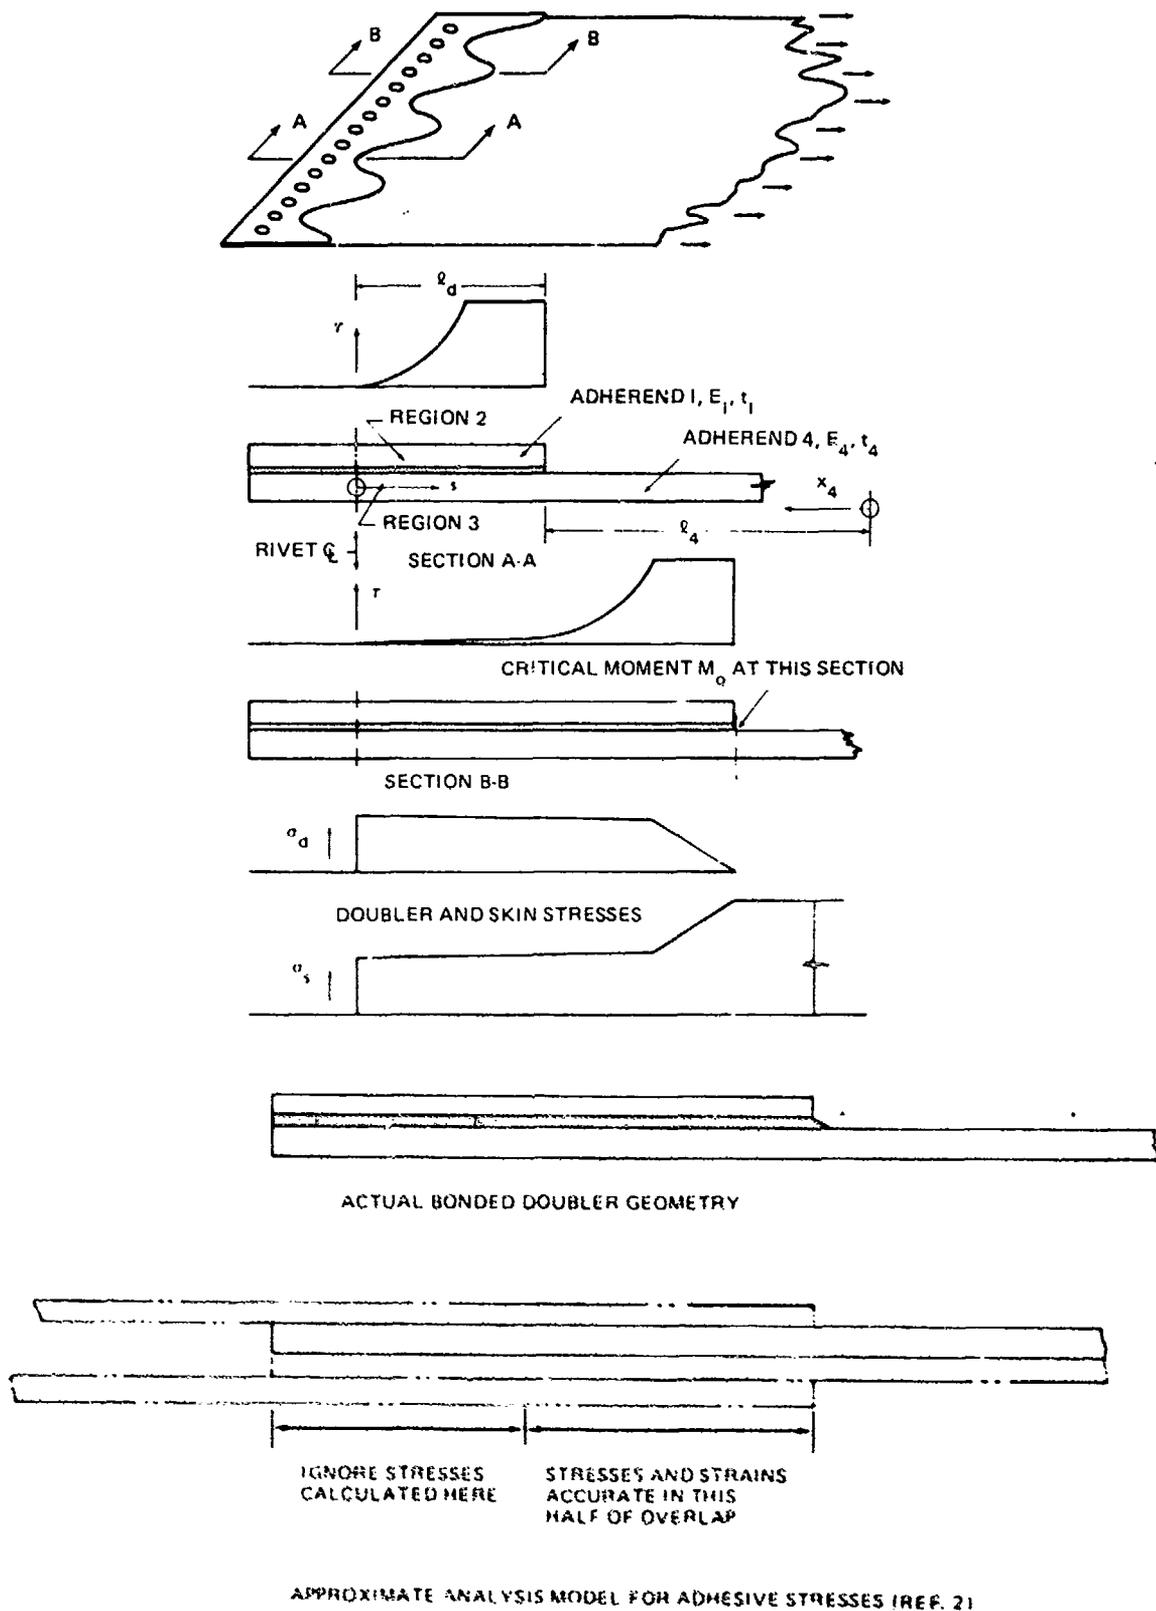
ADHESIVE STRESSES IN BONDED DOUBLERS
